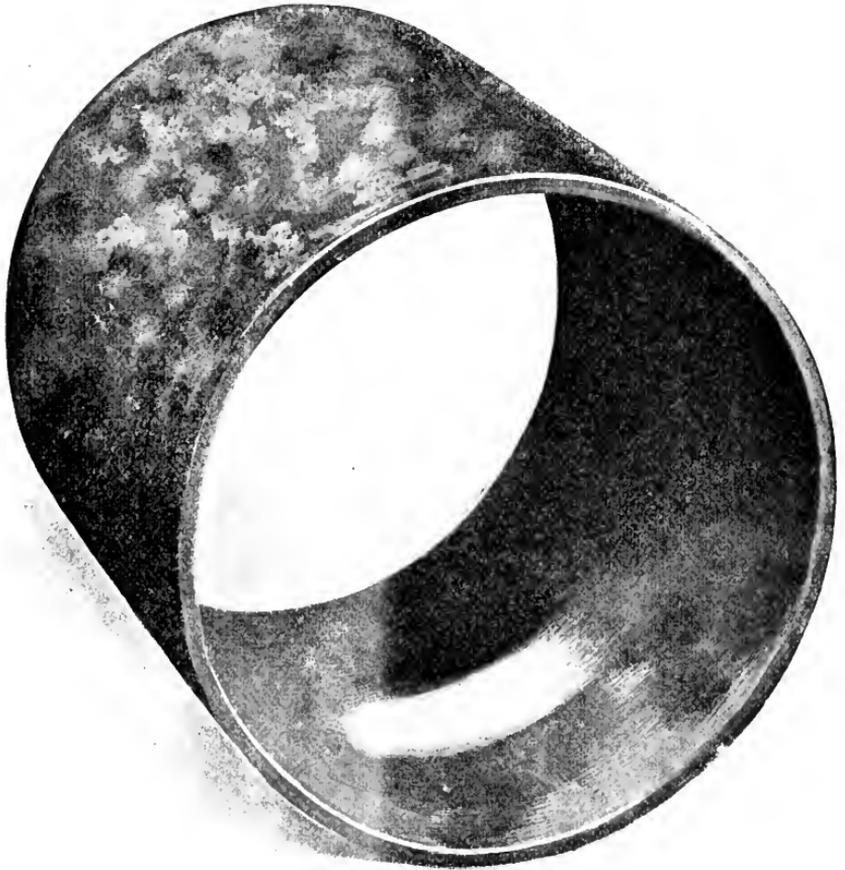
SECTION OF A TUBE RENDERED OVAL BY THE ACTION OF A TUBE CLEANER
